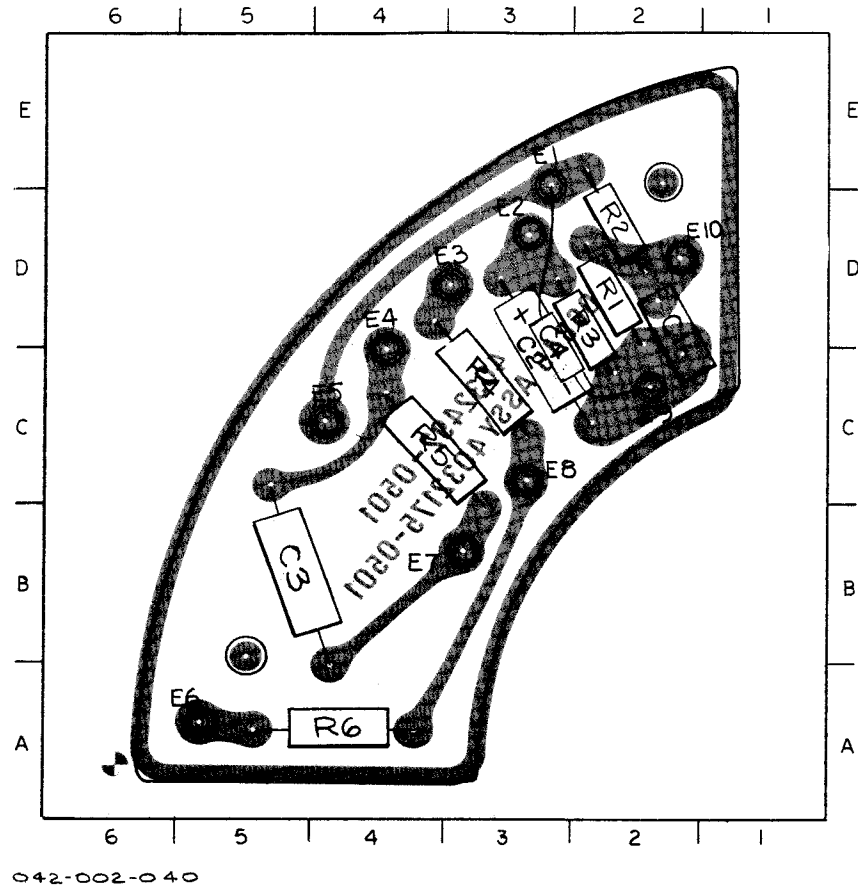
Tuning Rotor Assembly (P/O A2A4)
